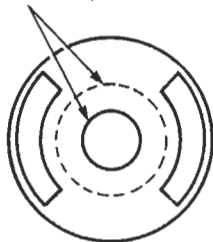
You must modify the universal shaft coupler by enlarging the 1/4-inch hole to 5/16-inch on half of each coupler. Optionally, replace the set screws with 6-32 screws.
